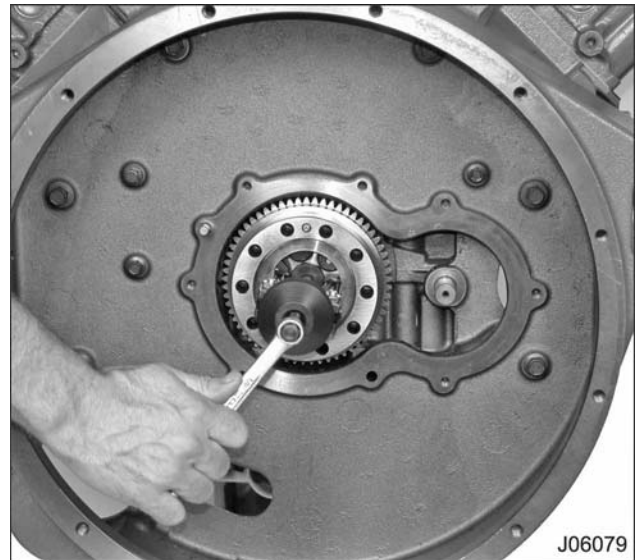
Crankshaft secondary flange removal (stripped chassis)
